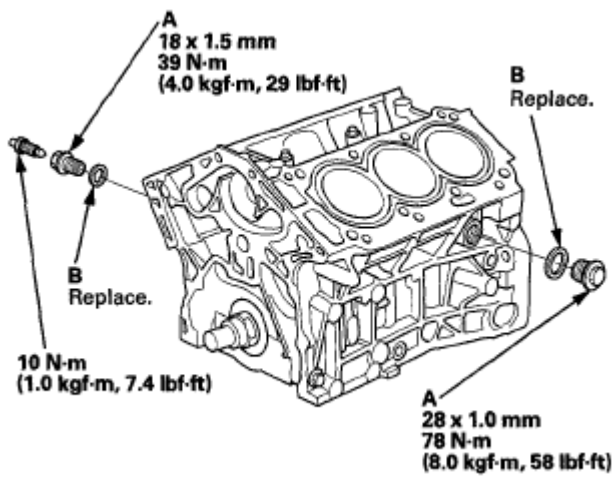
Identifying Sealing Bolts And Washers With Torque Specifications
